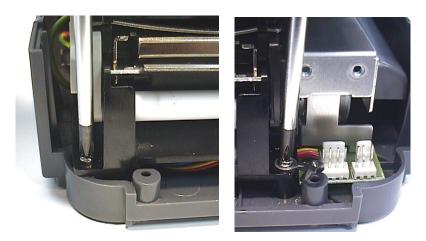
Remove the screws in the lower left, lower right corners of the main mechanism.
